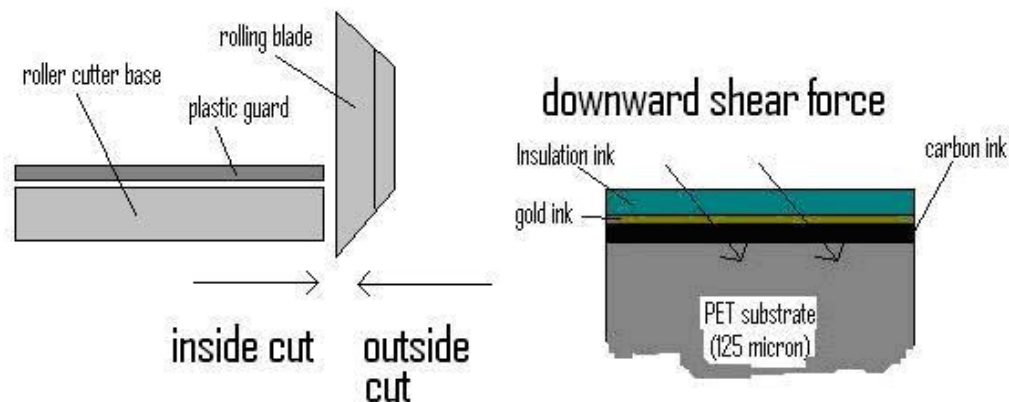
Schematic of the roller cutter and cut sensor edge
